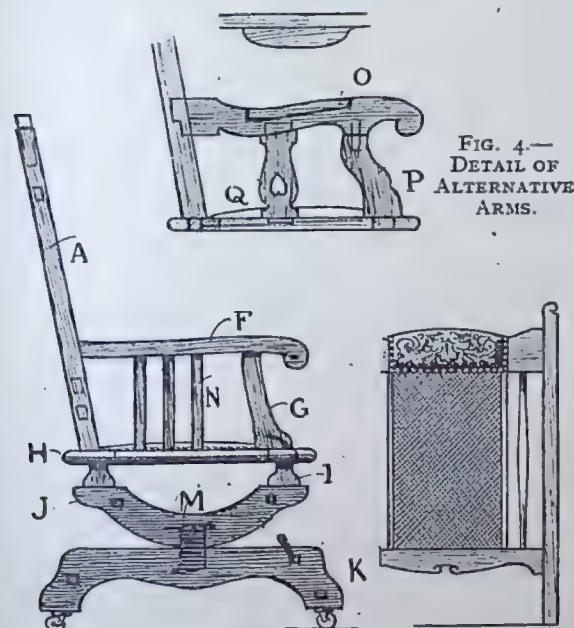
DETAIL OF ALTERNATIVE ARMS. FIG. 5.—SIDE ELEVATION. FIG. 6.—ALTERNATIVE BACK.
